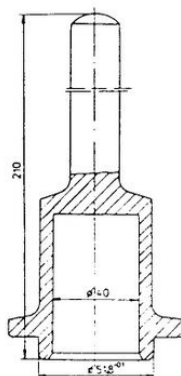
Mandrel for knocking of sealing ring in an oil pump housing
